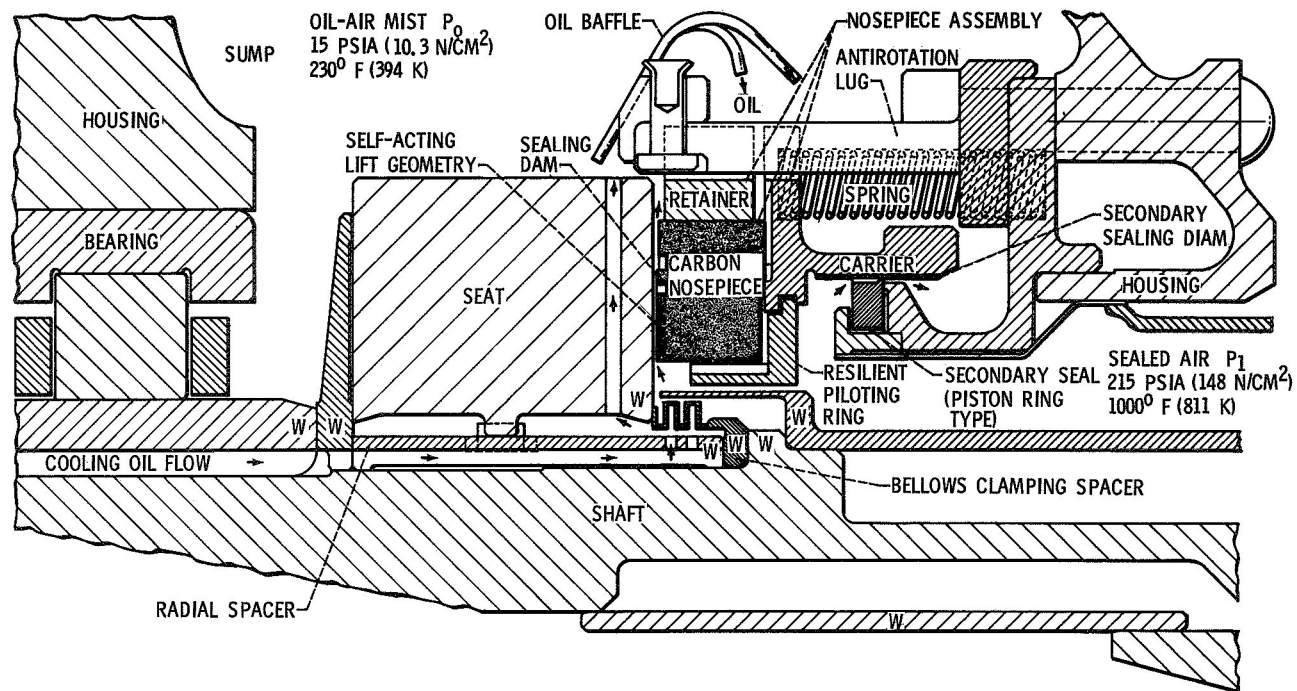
Shaft face seal with self-acting lift geometry (rotating parts marked W).
